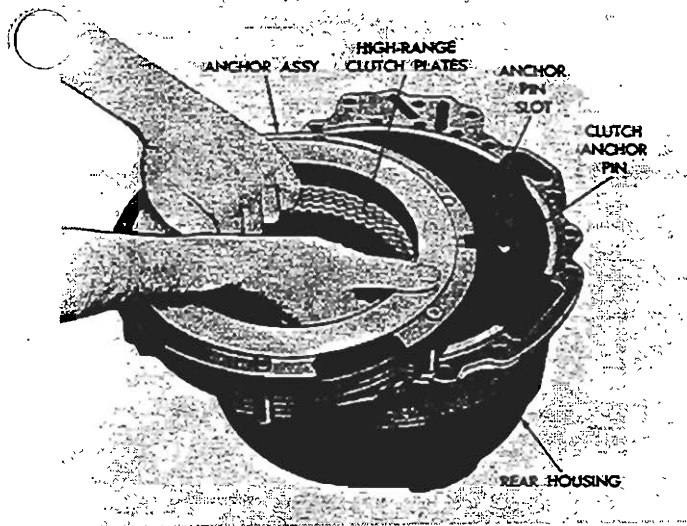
REAR HOUSINGS AND OUTPUT SHAFT
